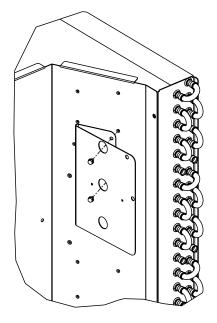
B - MOUNTING CONTROL BOARD SIDE DISCHARGE (HP)
